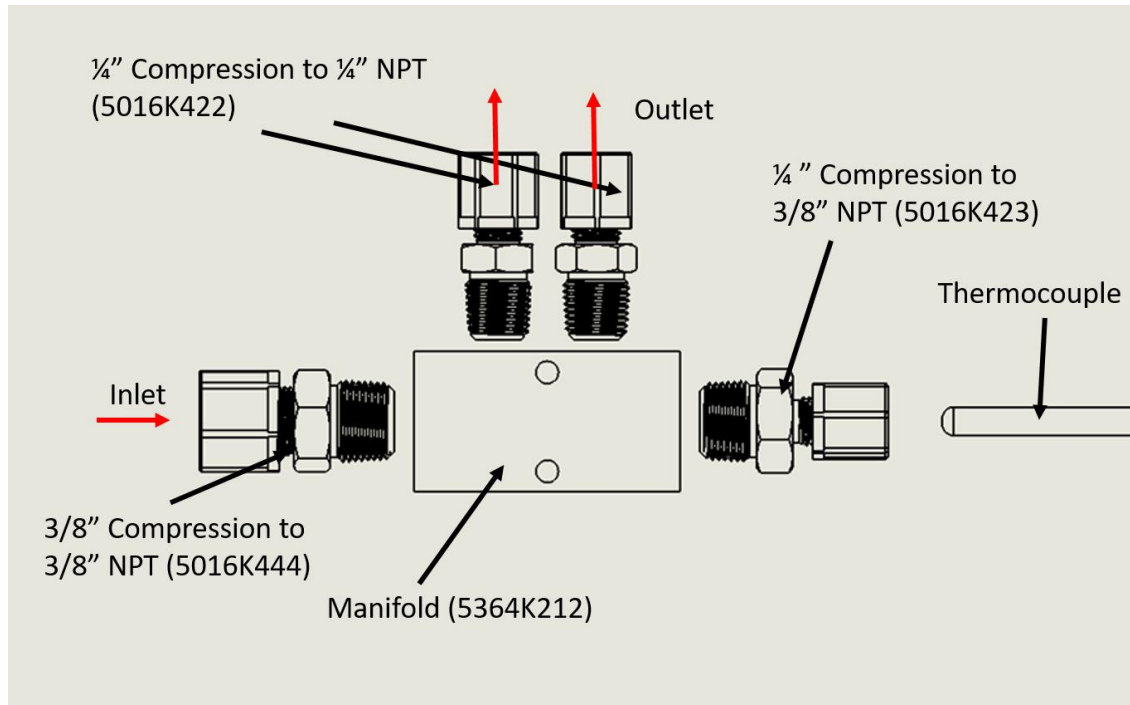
CAD drawing of the thermocouple integrating into the manifold of the ILS.
